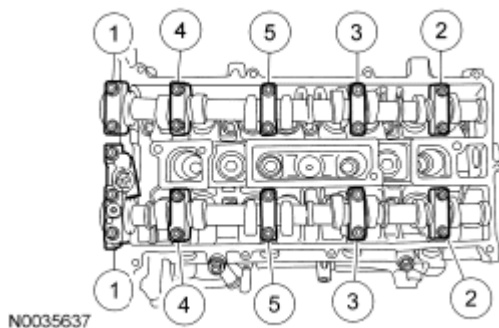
Identifying Camshaft Bearing Cap Bolts Loosening Sequence
